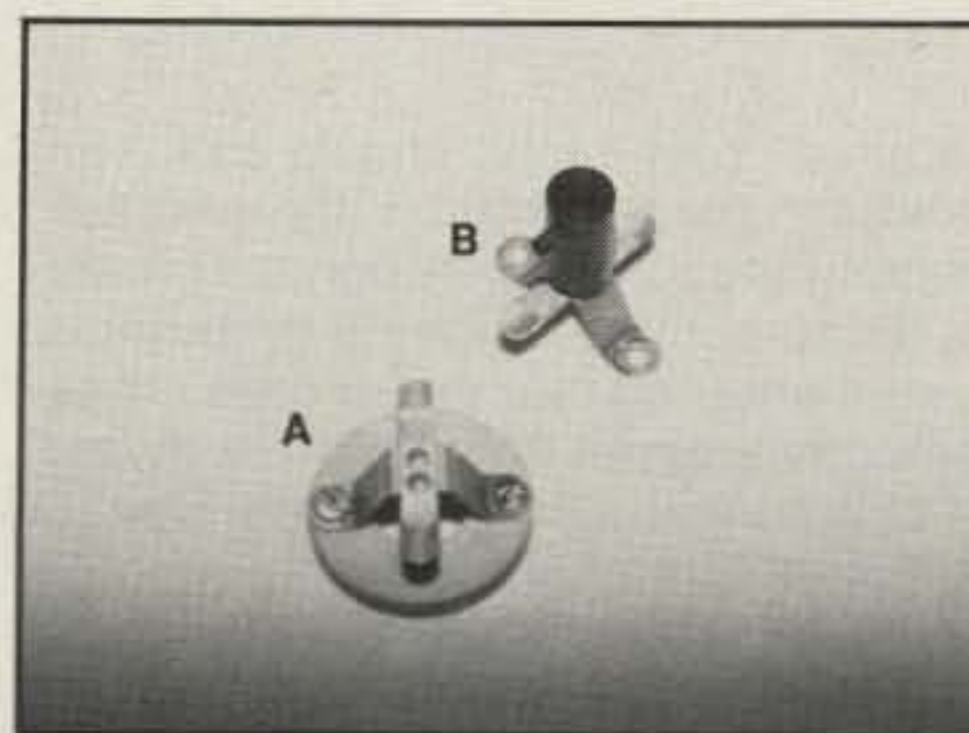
Shows at "A" the "V"-shaped bracket attached to its ceramic mounting disc as it was installed originally. At "B" the "V" bracket has been removed, soldered, drilled, and the Delrin coupling attached with two brass screws. This subassembly is then reinstalled on the ceramic disc.
